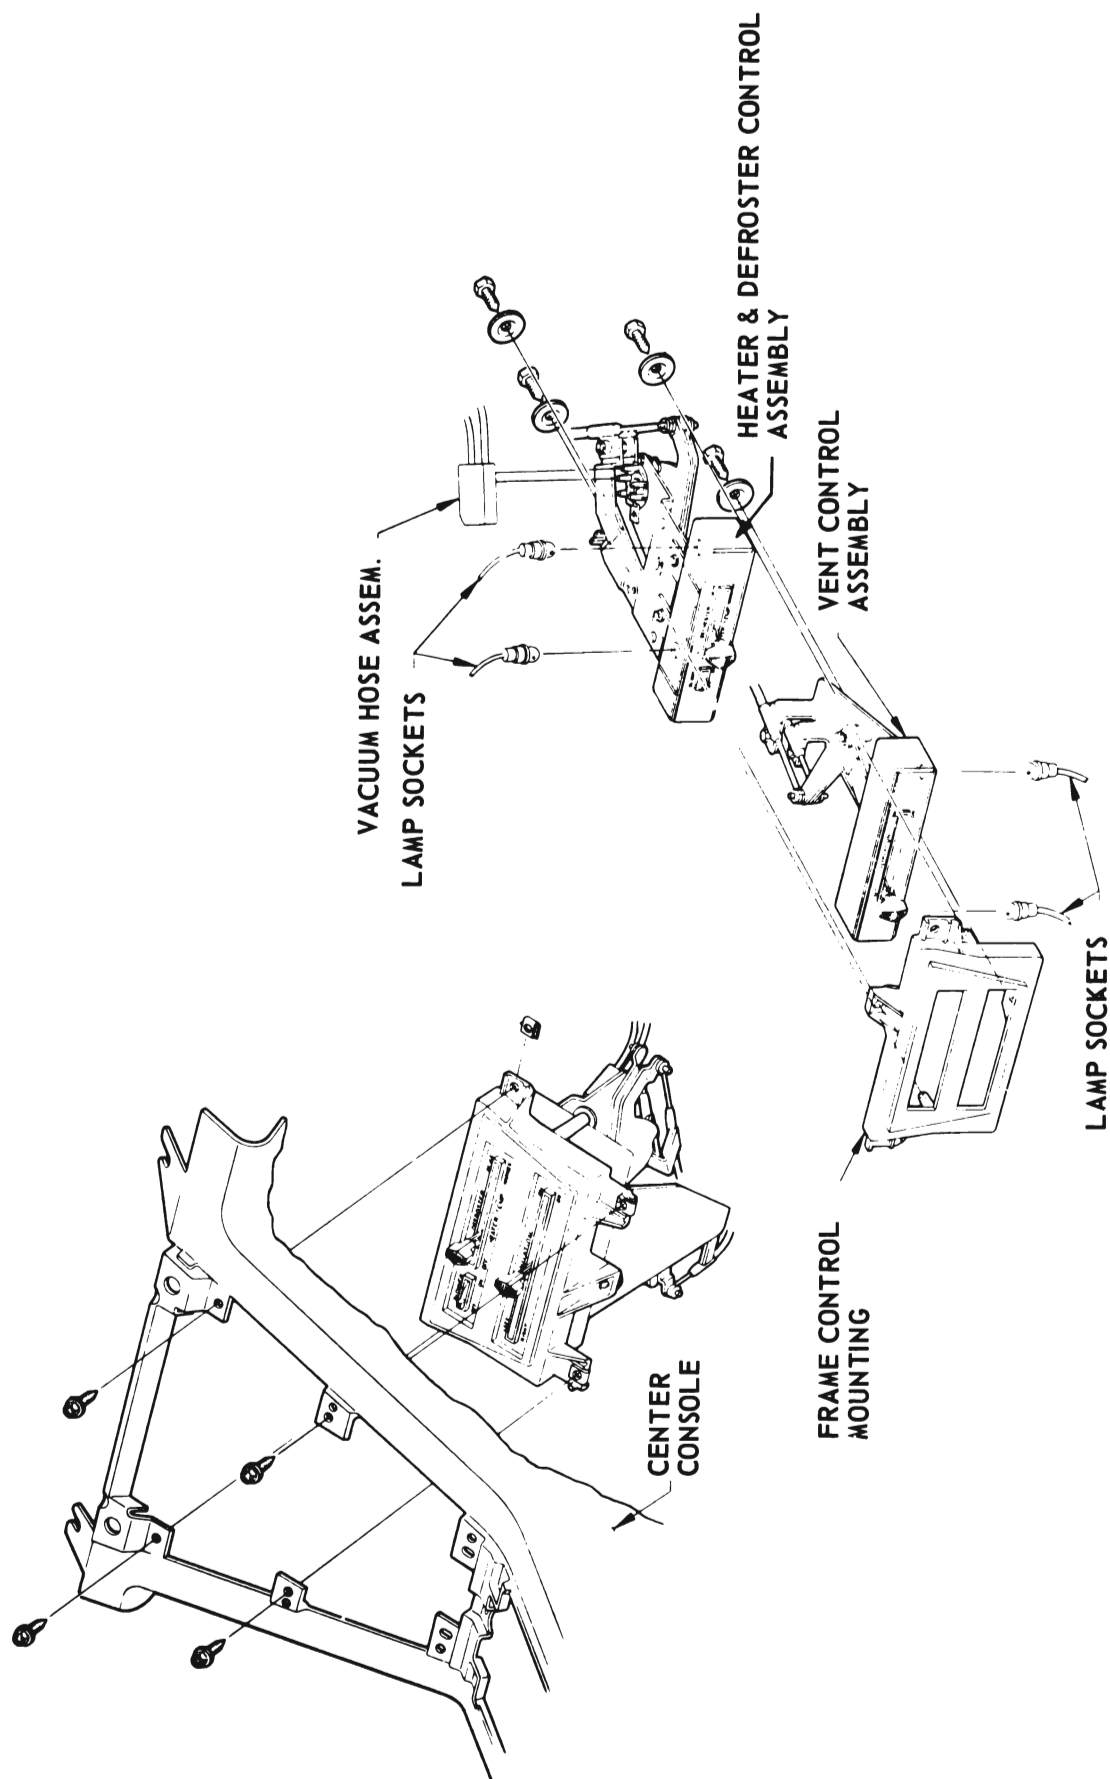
Heater and Defroster and Vent Control Assemblies Installation - 49000 Series
